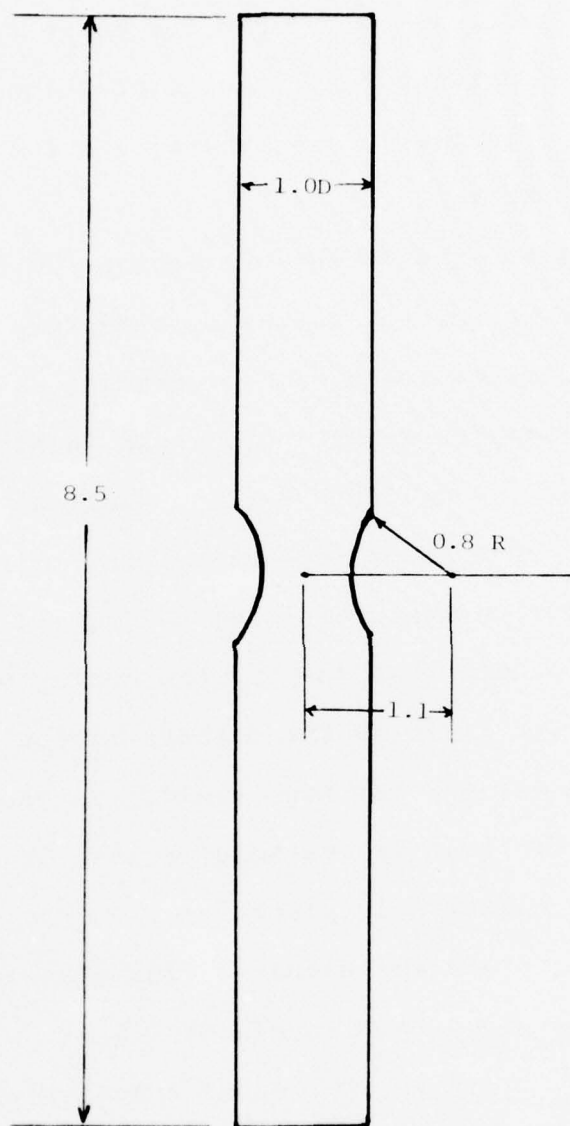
SHAPED CENTER POLE PIECE (NOT TO SCALE, ALL DIMENSIONS IN INCHES)
